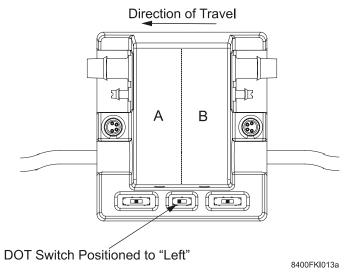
DOT Switch Setting for Right-Hand (RH) Section Assembly
